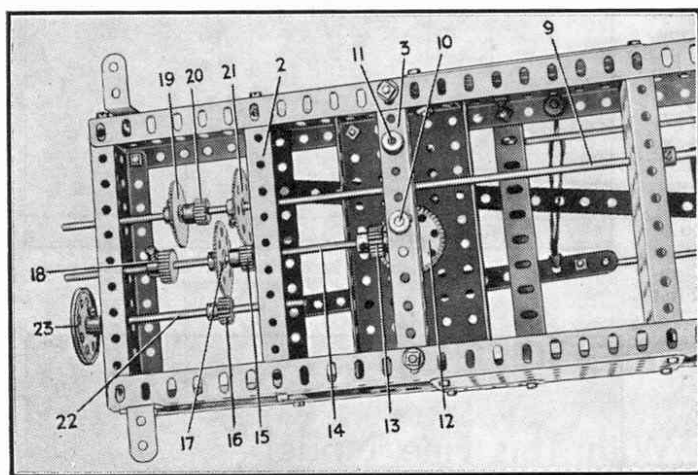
This illustration shows how the drive is transmitted to the crown head.
